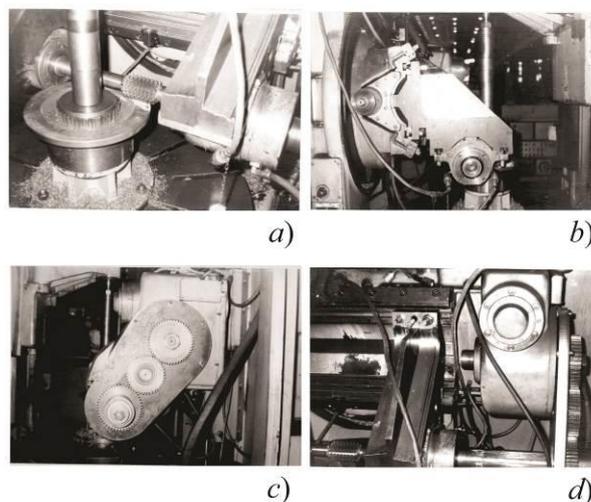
A device for ZFWZ 1250 hobbing machine: a) general type of the device; b) "inclined" console and left bearing for the working tool mandrel; c) "inclined" gear mechanism for a motion transformation to the working tool mandrel; d) a front view of the "inclined" gear mechanism and the right bearing support of the working tool mandrel.
